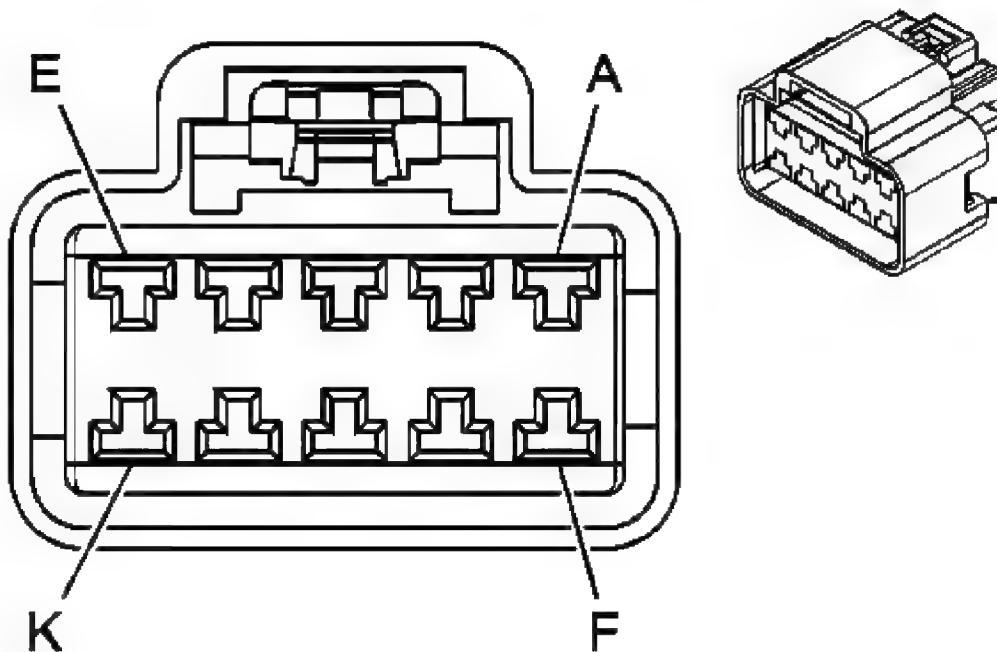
Driver Seat Adjuster Switch (A45) Connector End View
